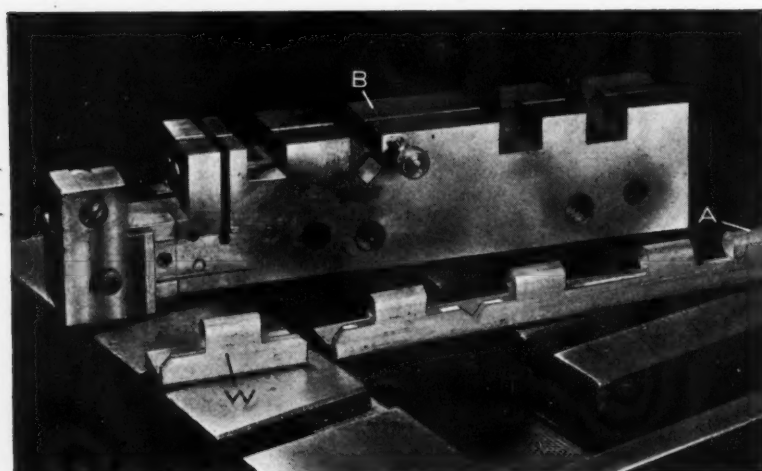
Progressive Milling Fixture and Completed Piece *W* Cut from Bar *A* on Fourth Milling Cut, with Bar Clamped in Fixture as Shown in Fig. 1
